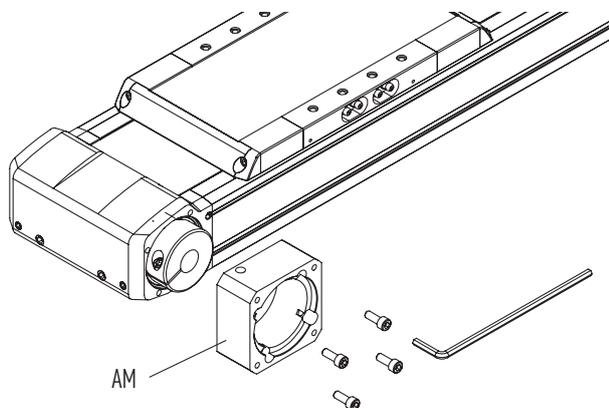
Mounting the motor adapter plate AM (HT-B)
